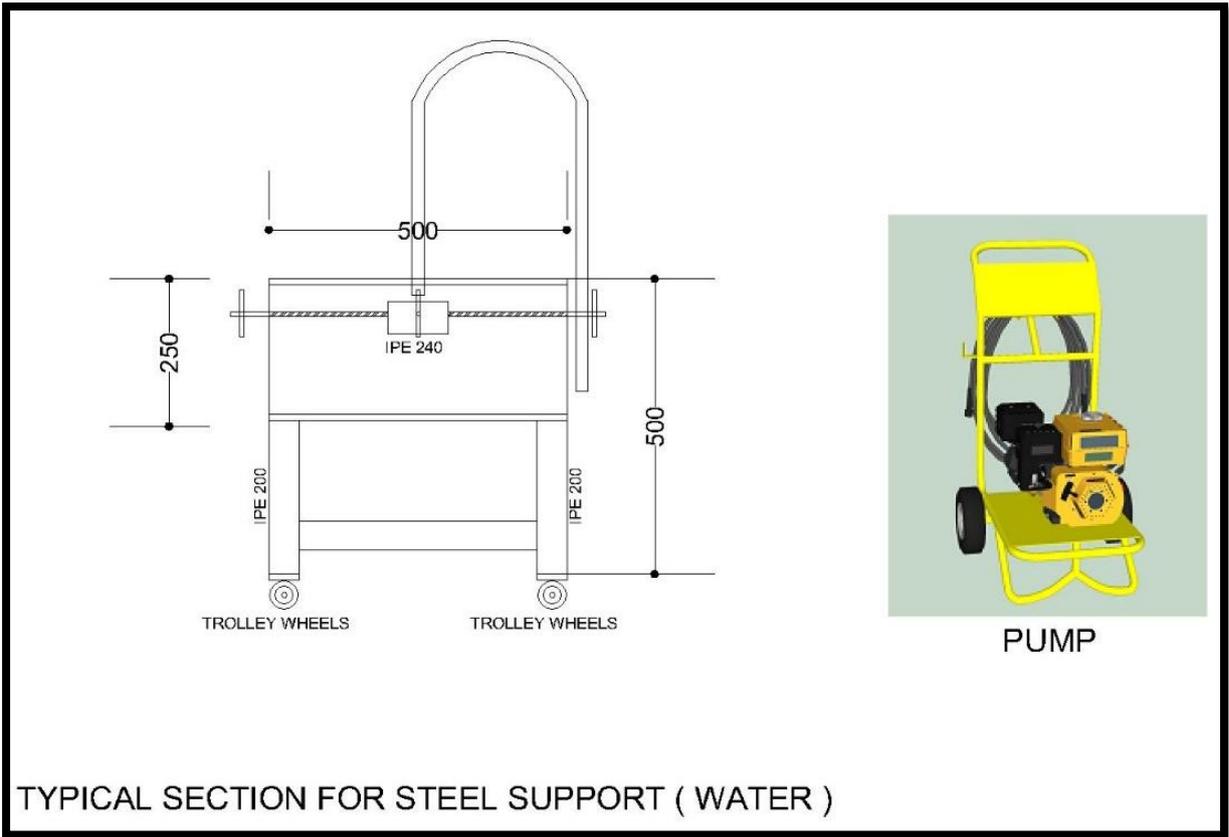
2D Drawing of Steel Trolley for Pump Support
